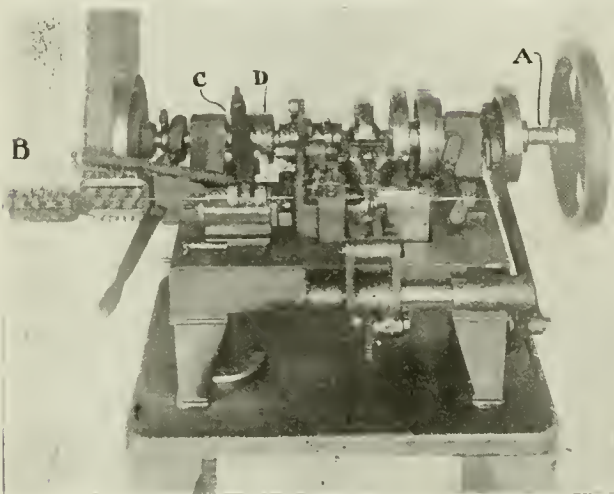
AUTOMATIC MACHINE FOR FORMING LADDER TYPE OF CHAIN.
